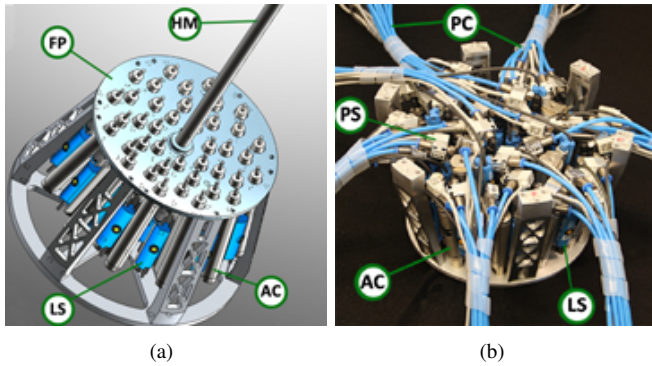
Muscle Actuation Unit (a) CAD model (b) Final assembly (without back plate). [FP: Front Plate, HM: Hand Mount, LS: Length Sensor, AC: Actuator, PS: Pressure Sensor, PC: Pneumatic Connectors]
